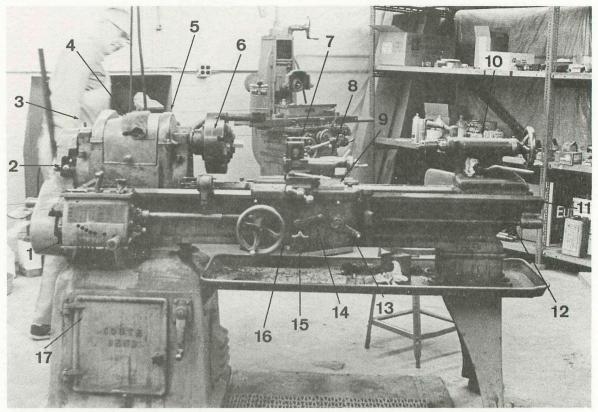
South Bend metal-turning lathe suitable for tool room or manufacturing use. Metal lathe components: (1) gear change levers, (2) feed reverse lever, (3) back gear lever, (4) belt drive under protective cover, (5) headstock, (6) four-jaw chuck, (7) quick-set tool holder, (8) compound slide rest, (9) saddle or carriage, (10) tailstock, (11) lathe bed, (12) lead screw, (13) half-nut lever, (14) feed selector, (15) power feed clutch, (16) hand-feed wheel, (17) motor in leg.
